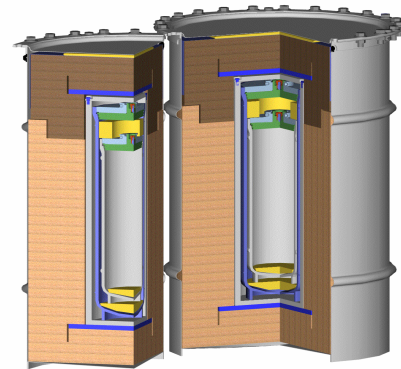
Illustration of 9975 package including fiberboard overpack, lead shielding, and double containment vessels.
